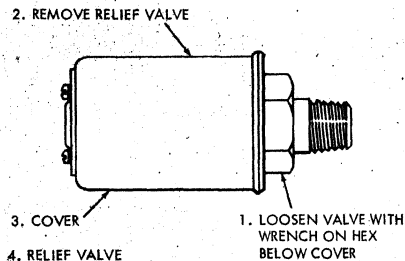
Hydraulic tank relief valve, removal and installation.
